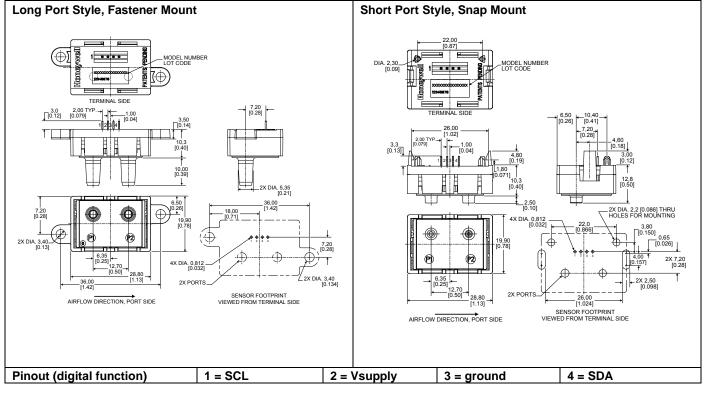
Mounting Dimensions (For reference only: mm [in]). Additional port and housing styles available.
